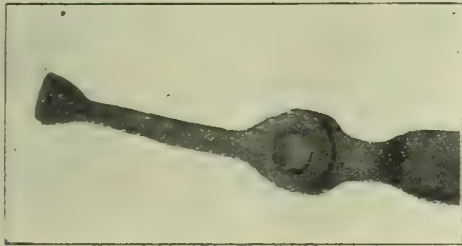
Seam Opened Out in partly forged Connecting Rod.
